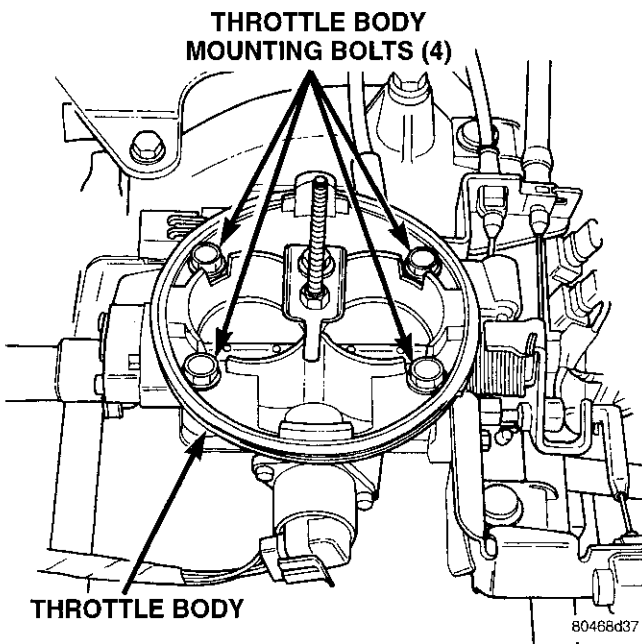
Throttle Body Mounting Bolts—3.9L/5.2L/5.9L ENGINES—Typical
